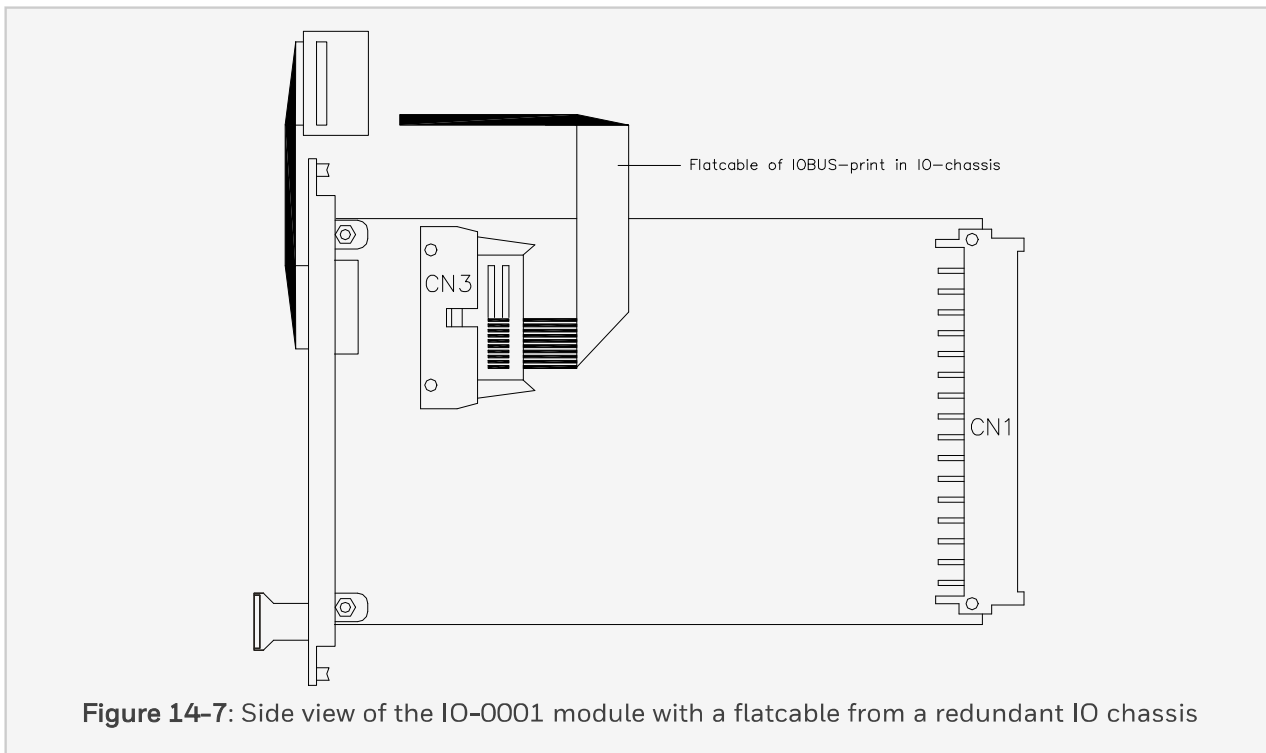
Side view of the IO-0001 module with a flatcable from a redundant IO chassis
